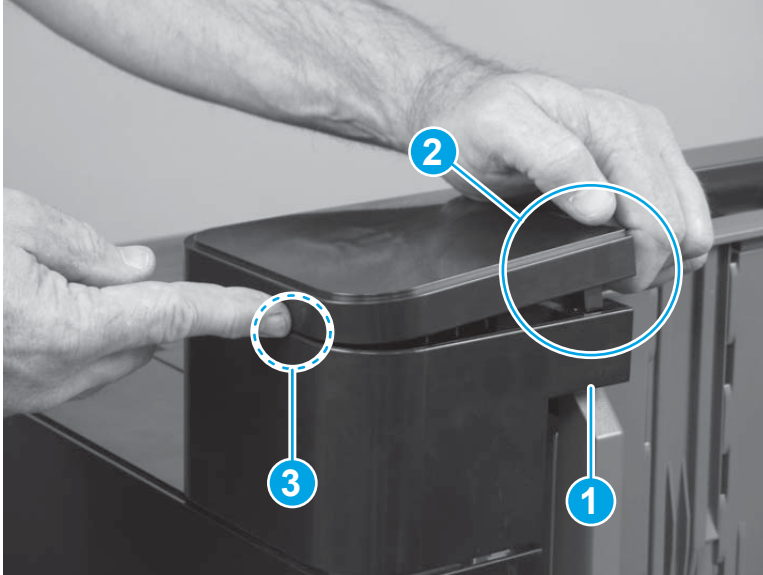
Remove the open/close stepped cover assembly (2 of 2)
